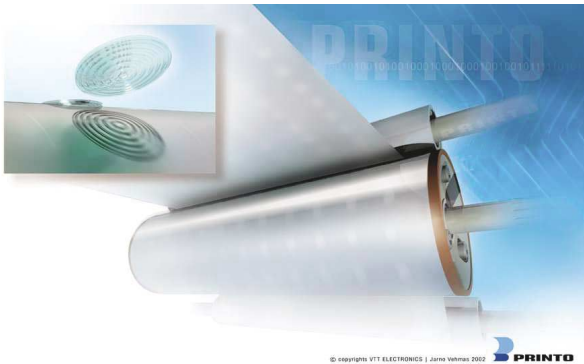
Hot-embossing roll-to-roll manufacturing method for optical elements.
